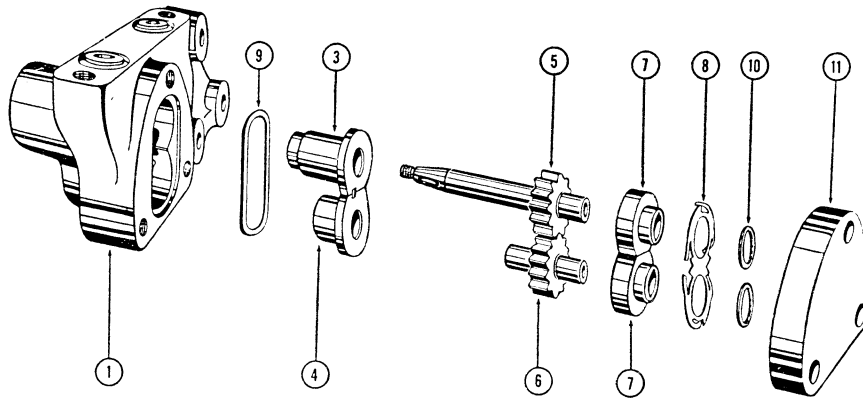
Exploded view of Pony hydraulic lift pump.
